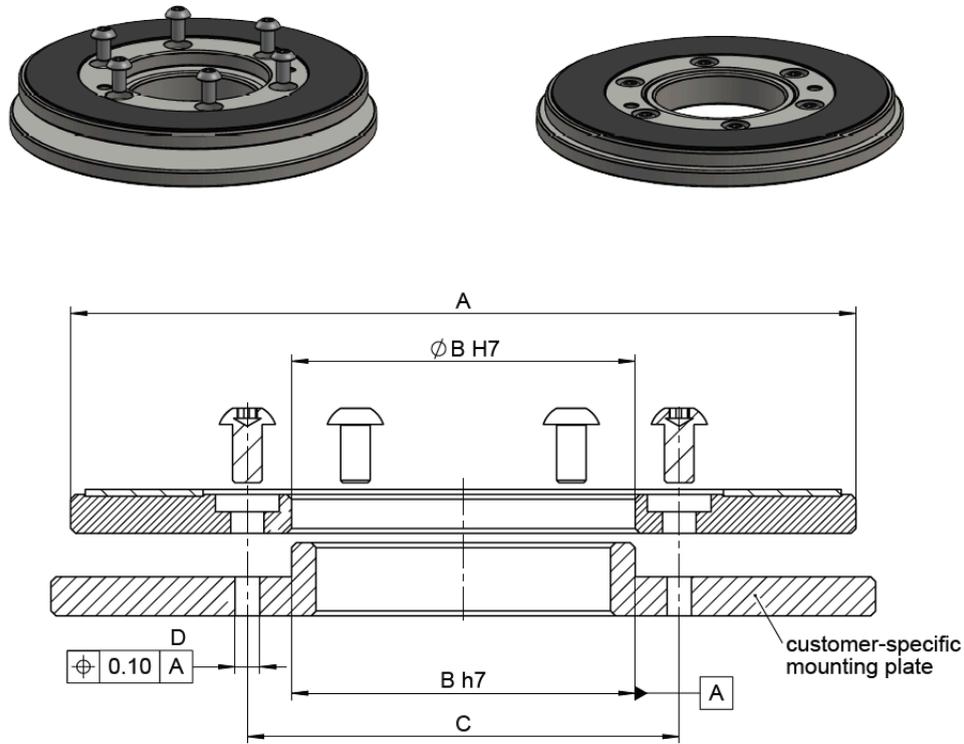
GMI Angle Rotor (GAR) mounting using ID sliding fit
